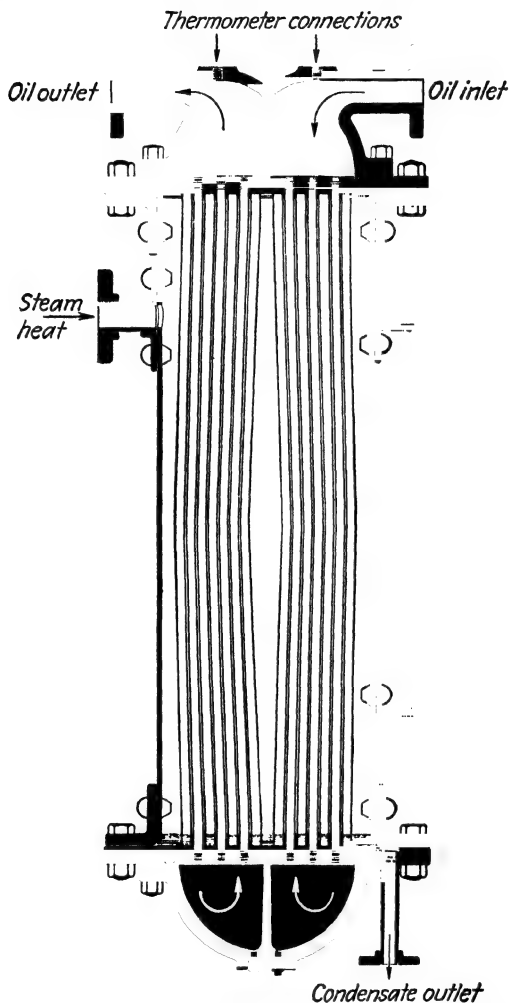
Shell-and-tube-type fuel-oil heater. (Courtesy of Schutte and Koerting Company.)
